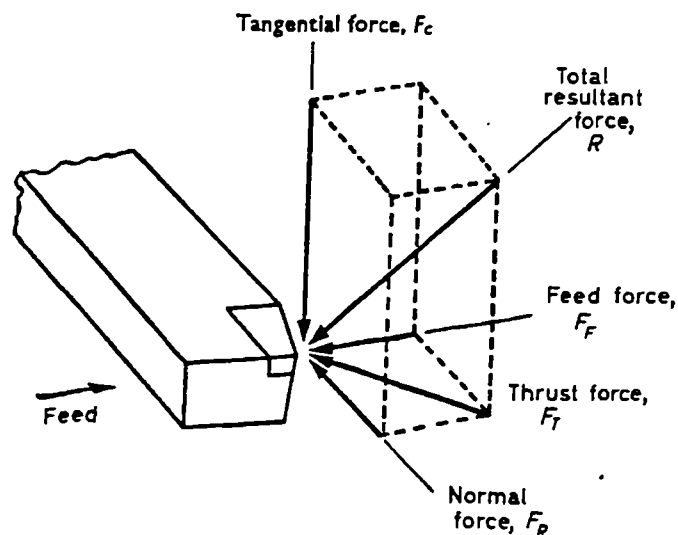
Three components of force acting on a single point cutting tool during oblique or 3-dimensional cutting [Boothroyd (1983)].
